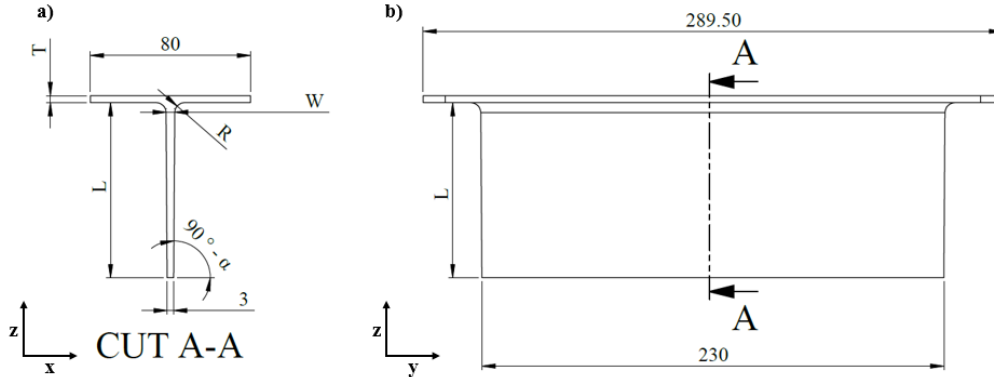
Dimension of investigated ribs with a) cut view and b) longitudinal view.
